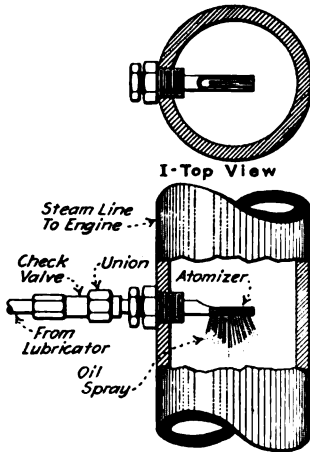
Atomiser for internal lubrication of steam engines. (This arrangement may be used with any internal-lubricating apparatus.)
